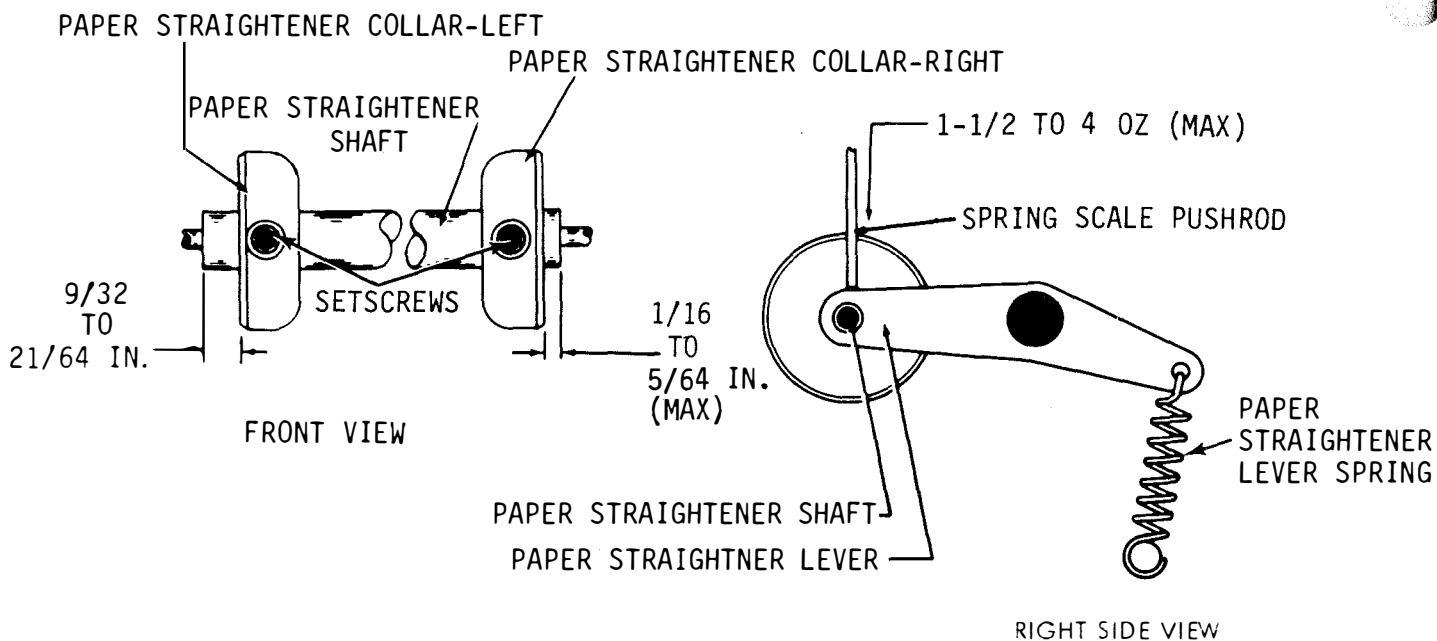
Paper Straightener Collar and Paper Straightener Lever Spring (Friction Feed)
